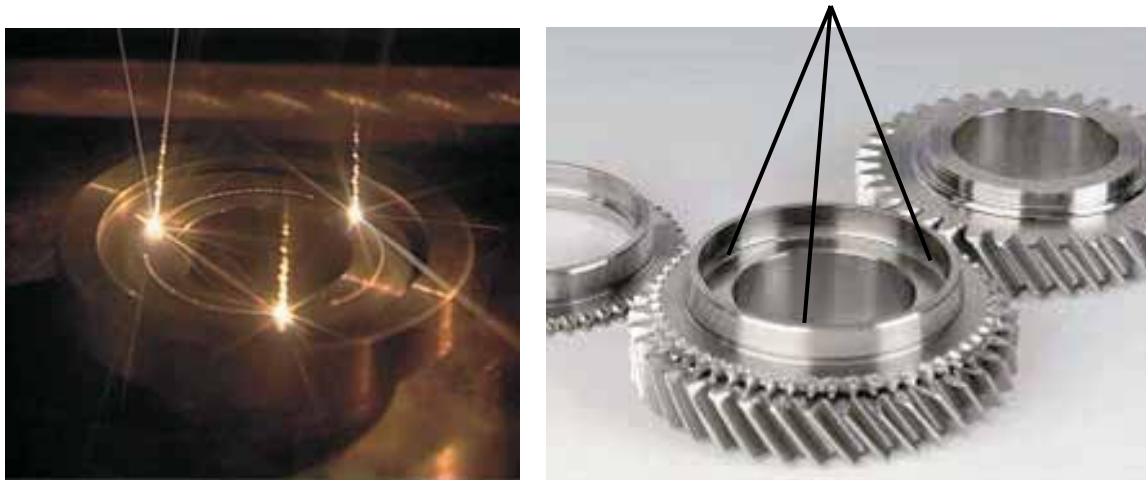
, 104: Triple beam welding of synchronizing gears prevents axis offset.
